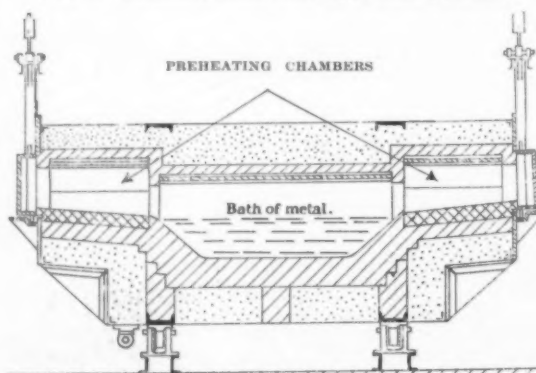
Sectional elevation of furnace shown in Fig. 3, illustrating the arrangements.
